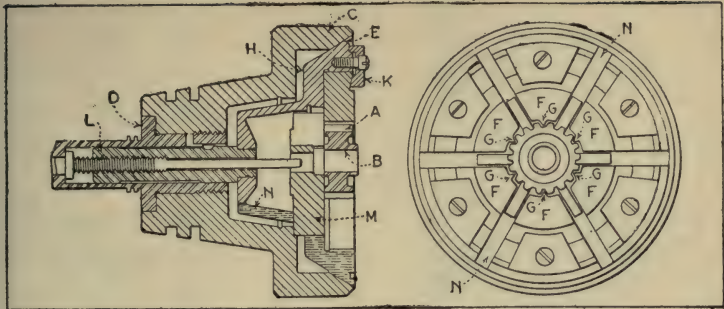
SECTION AND PLAN OF AN ADAPTABLE FIXTURE FOR GRINDING SPUR GEARS
